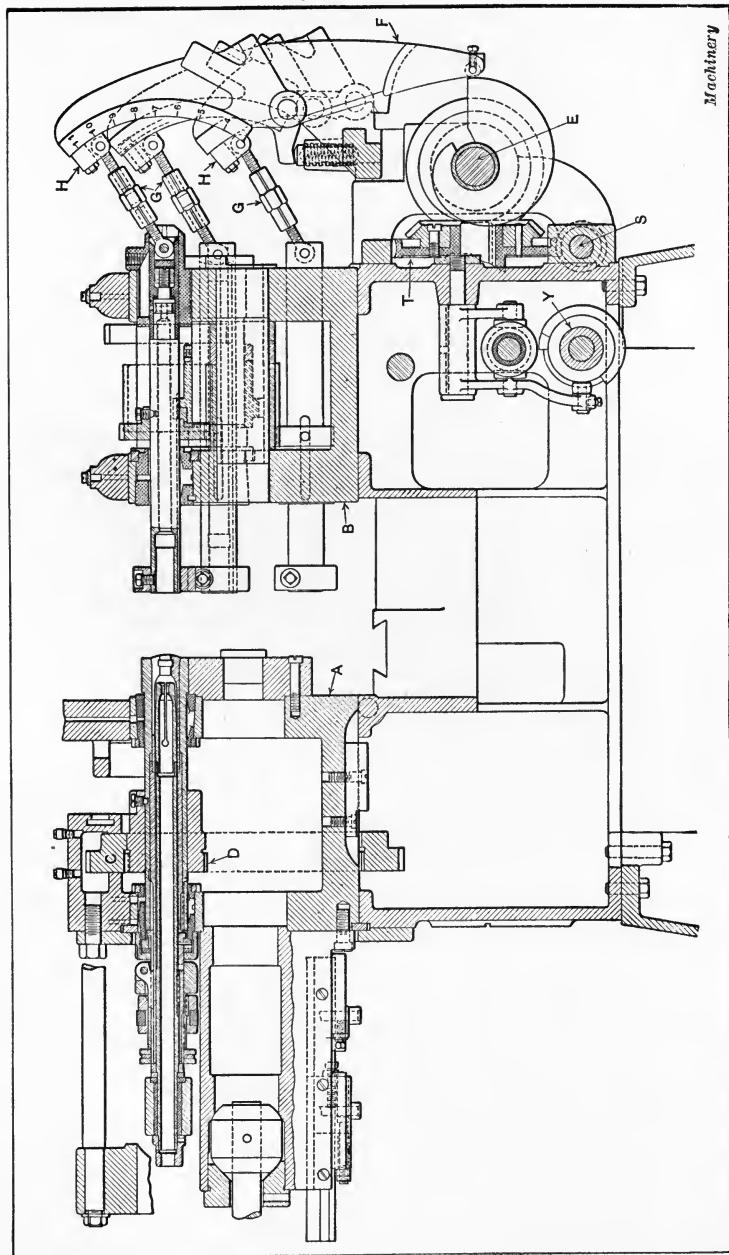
Davenport Five-spindle Automatic Screw Machine
